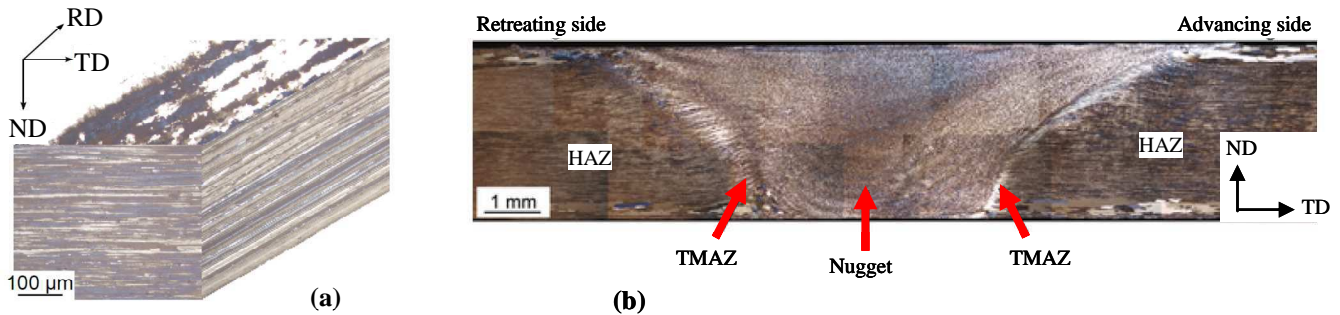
General view (a) of the grain structure of the studied sheet and (b) of a FSW joint (TMAZ: thermo-mechanically affected zone; HAZ: heat-affected zone)
